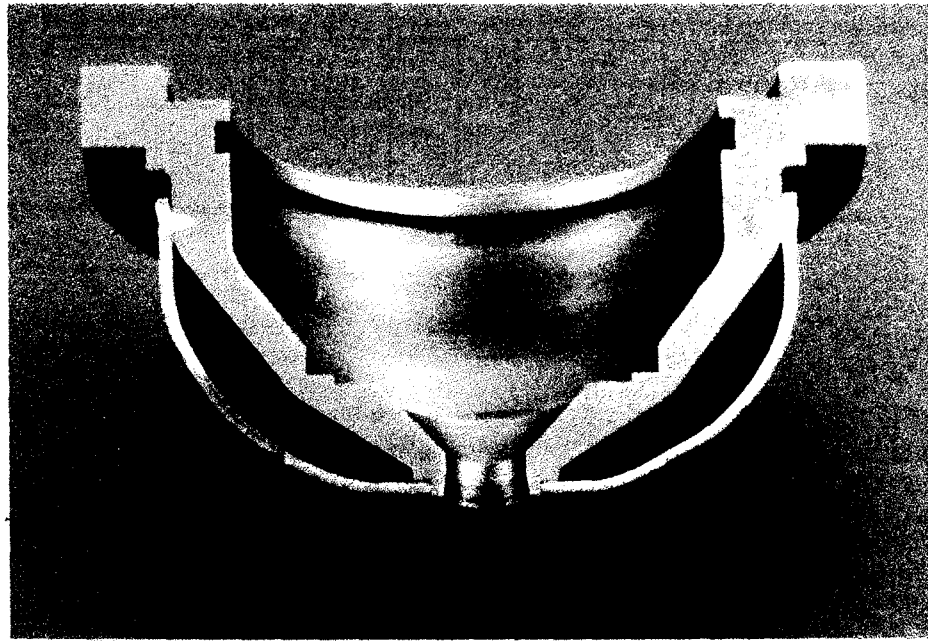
Cross Section of a Laser Beam Weld Joining a 416 Stainless Steel Cap to a 310 Stainless Steel Body
